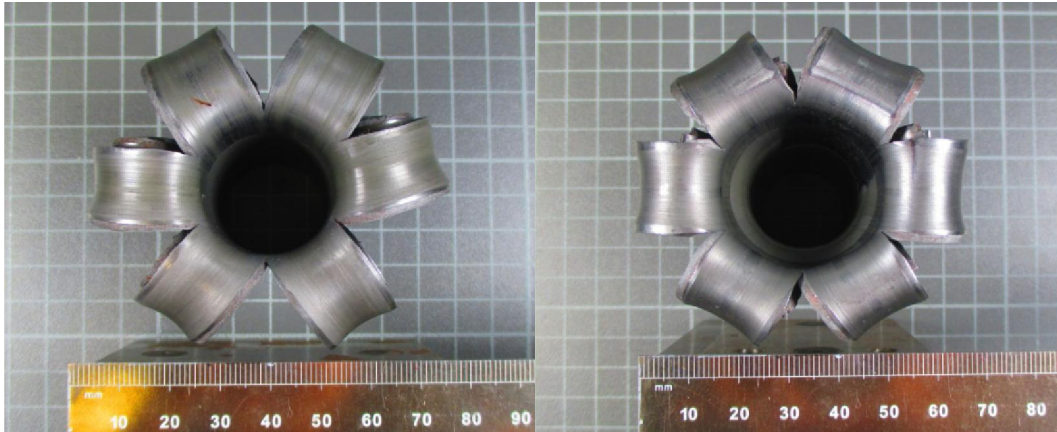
Top view of splitting (left) and hybrid R125A15D08 tubes (right) showing strip merging in the splitting specimen (top strips)
